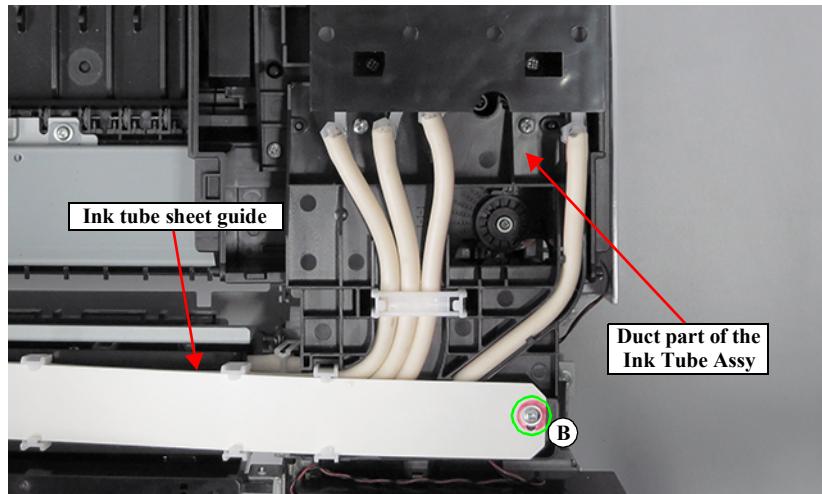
Removing the duct part of the Ink Tube Assy (2)
